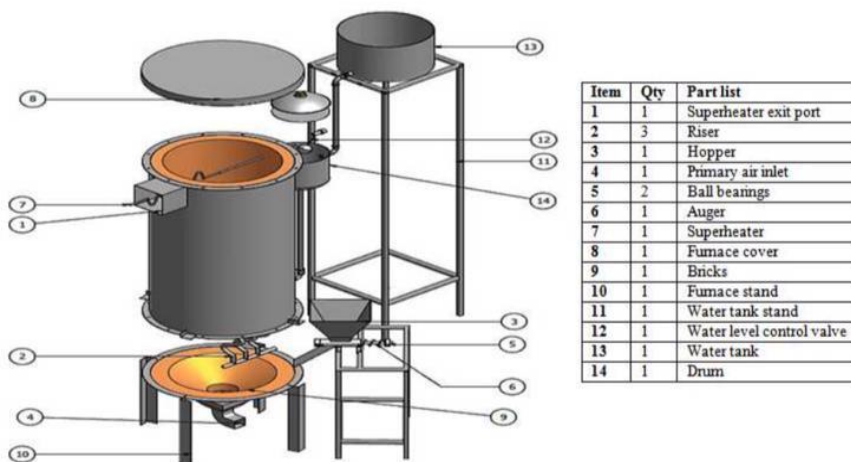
Exploded view of the developed PKS Combusting Furnace Unit
